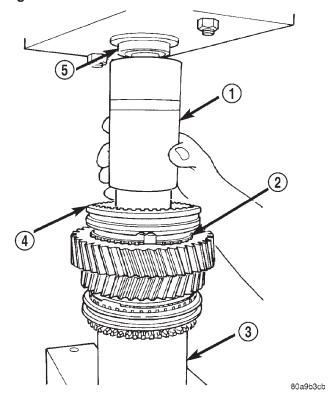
Pressing 1-2 Synchro Assembly Onto Output Shaft
